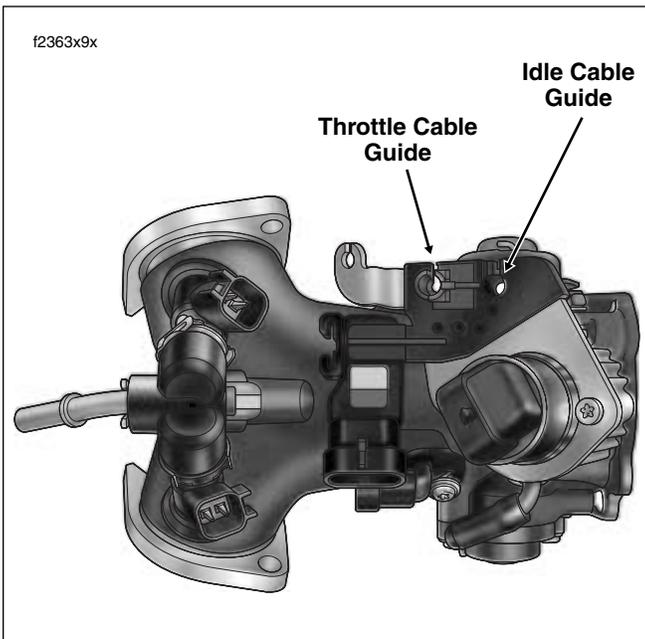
Throttle Cable Assembly - Induction Module Side
